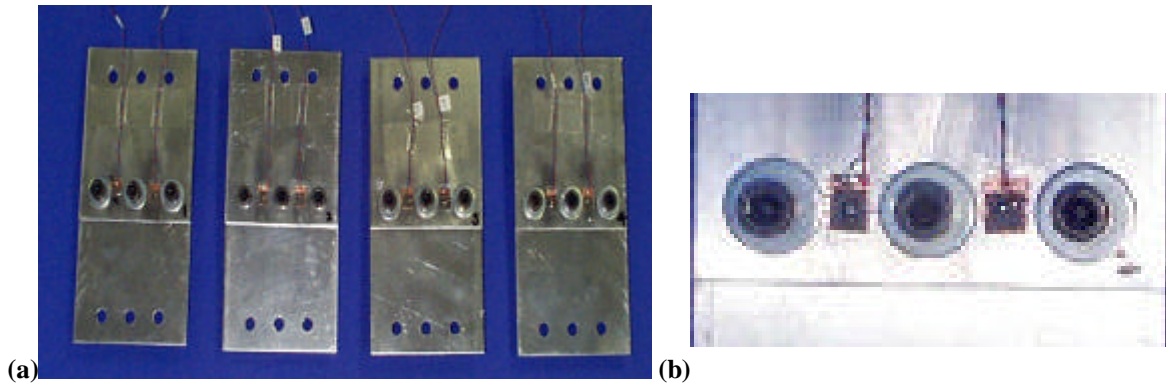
High-frequency electro-mechanical impedance health monitoring testing of bolted joints: (a) Four shear lap joint tension specimens. (b) Close-up view of one of the joints showing bolt-heads, washers, and the placement of two PZT active sensors (Giurgiutiu, Turner, and Rogers, 1999)
